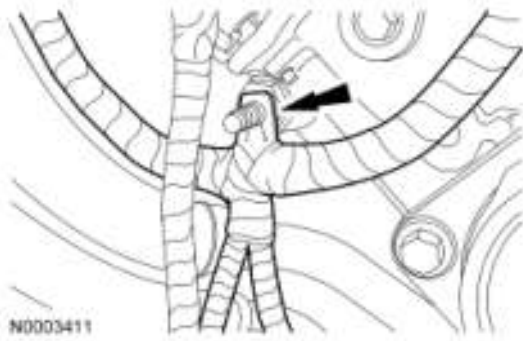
Identifying Generator Wiring Harness Retainer
